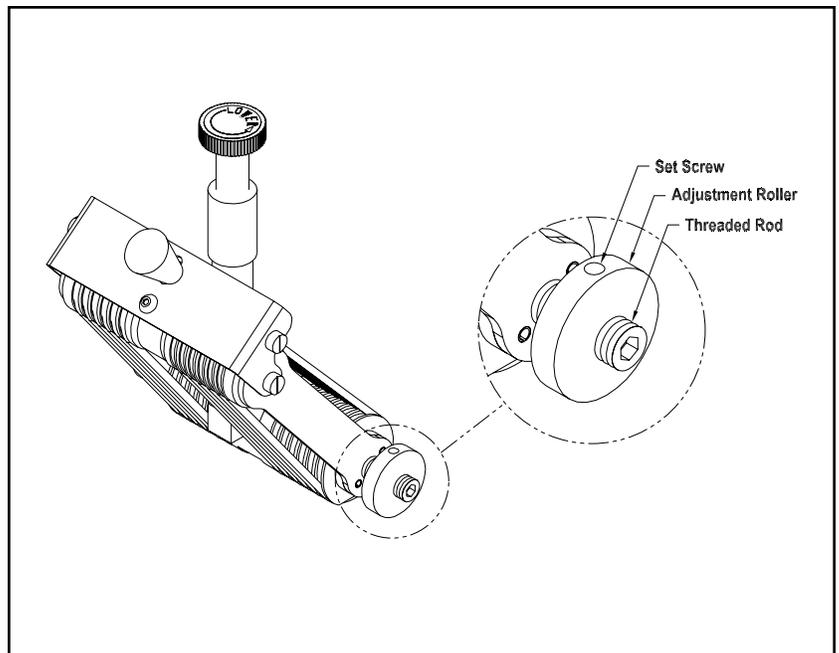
Horizon Adjustment Mechanism (shown on Advancing O-Ring Gate)
